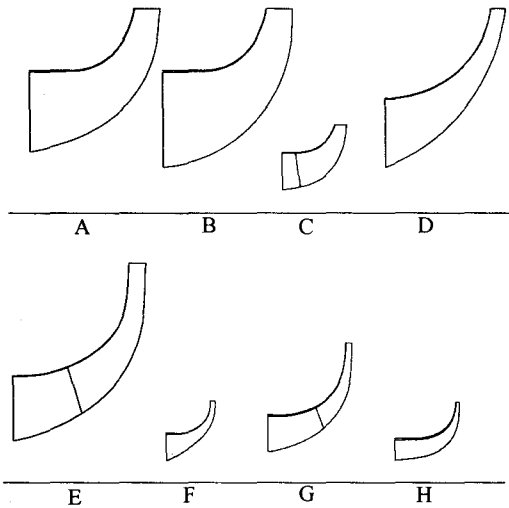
Meridional view of 8 centrifugal compressor impellers
